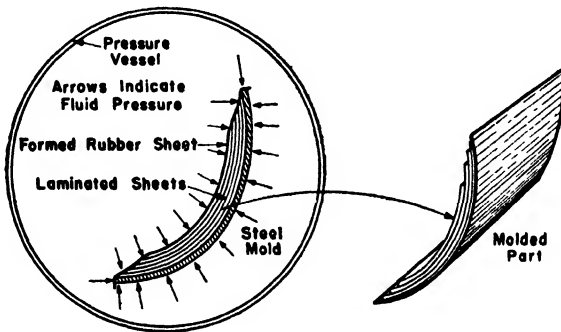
Schematic sketch showing the method of low pressure laminating plastic parts.
